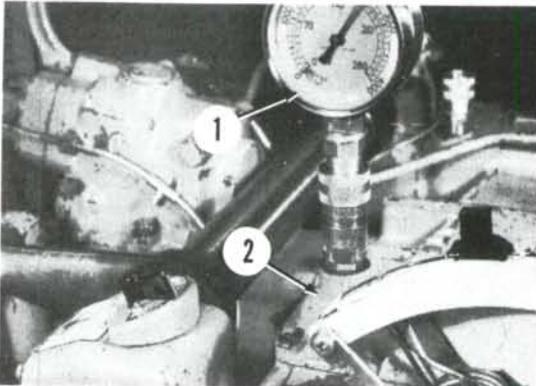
To check system pressure on models with front mounted pump and not equipped with remote valve, remove cover from distribution block and install adapter plate (2) part no. K962234. Install 0-20000 kPa (0-3000 psi) pressure gage in adapter plate test port.
